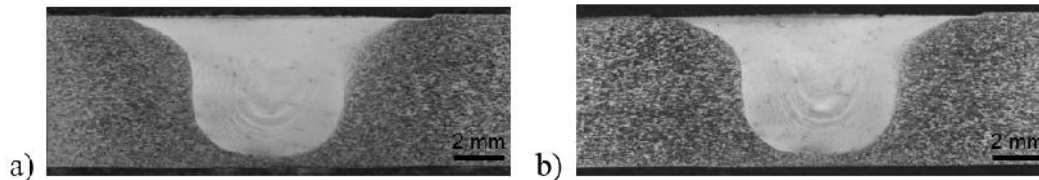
Defect free macro images for weld 3 and 4.
